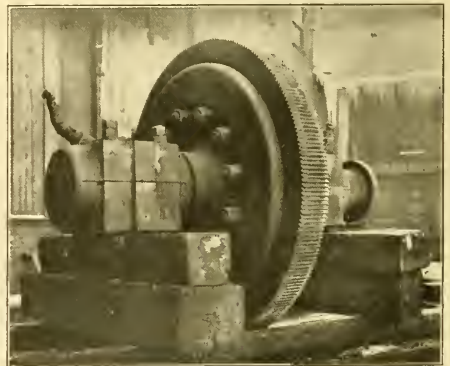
A VIEW OF ONE OF THE MILLING TOOLS
